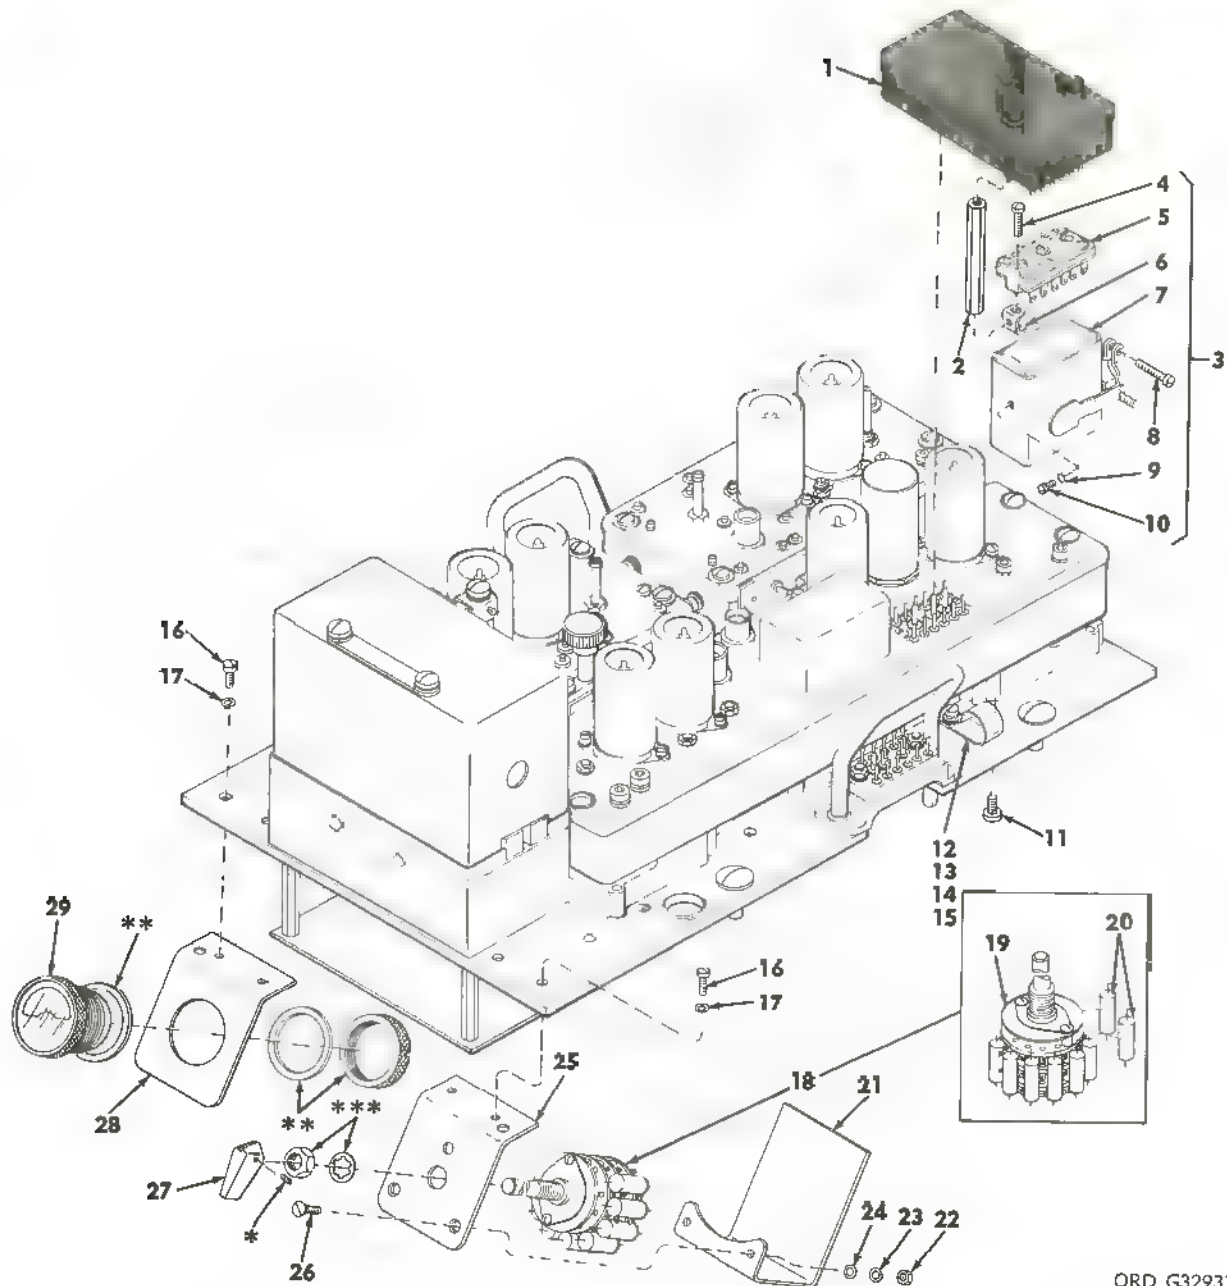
RECEIVER-TRANSMITTER-RADAR SUBASSEMBLY /8172416/-PARTIAL EXPLODED VIEW
